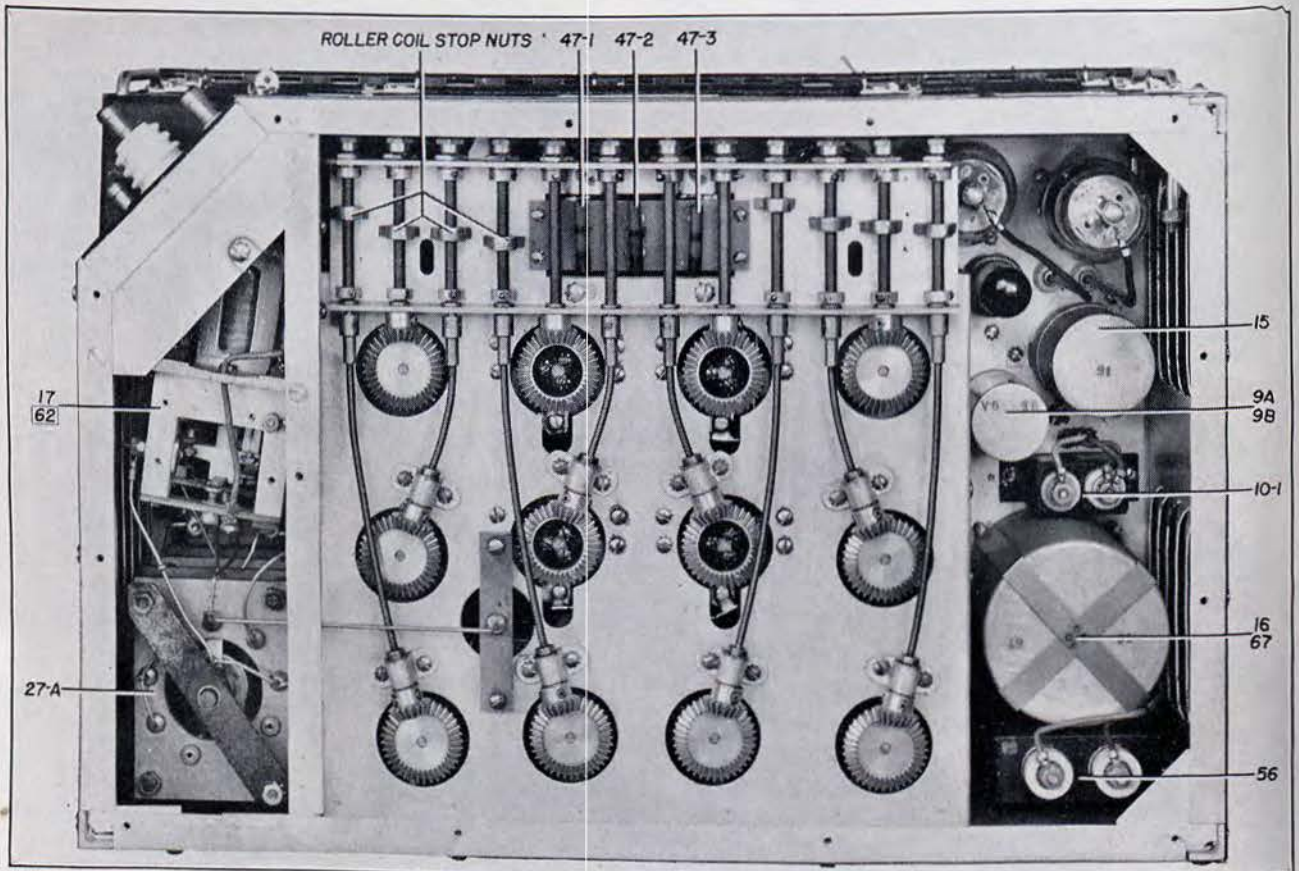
RADIO TRANSMITTER BC-338-A OR BC-353-A, TOP VIEW SHIELD REMOVED
